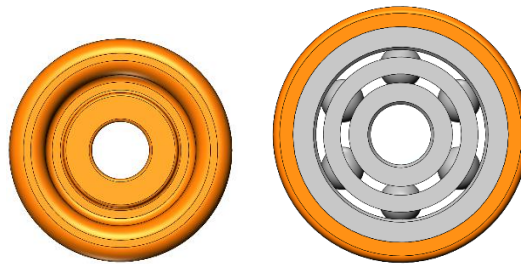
Drawer wheels (left) and cabinet wheels (right) of BEACH BEARING.
